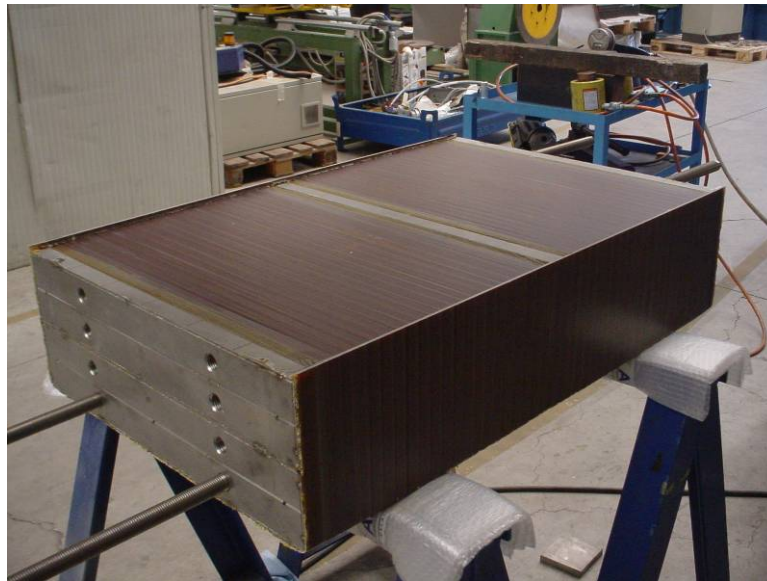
Picture of the TF pancake mock-up for shear tests on the insulation.
